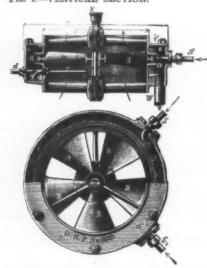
HORIZONTAL SECTION AND PLAN VIEW.
